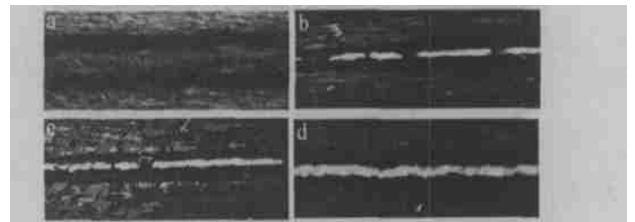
Back of No. 1~ No. 4 weld
